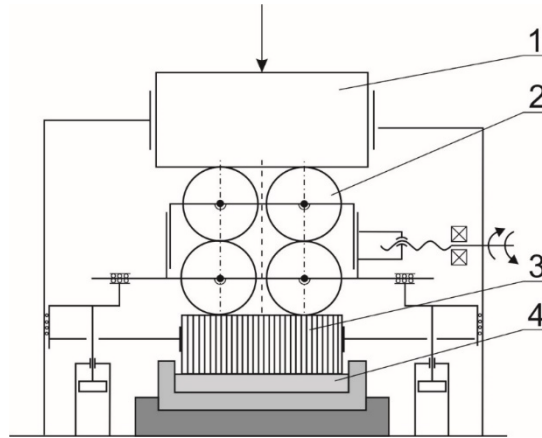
A segmental forming device with reciprocating movement of the working rolls: 1. Press ram, 2. Rolls, 3. Segmental punch, 4. Workpiece
